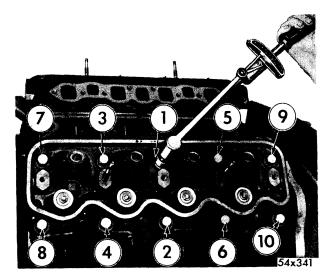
Tightening Cylinder Head Bolts (Typical)
